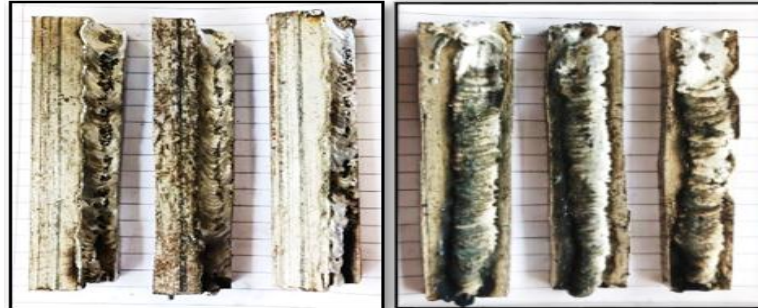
Al Lap and Butt Welding Specimen.
